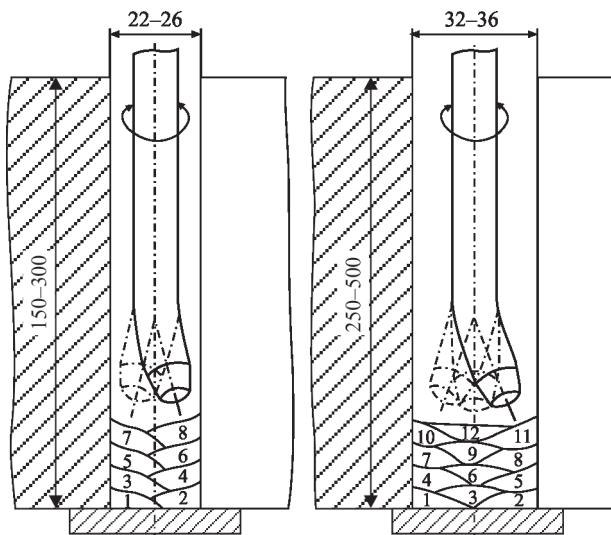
Examples of bead arrangement by the optimized technology of narrow-gap welding
